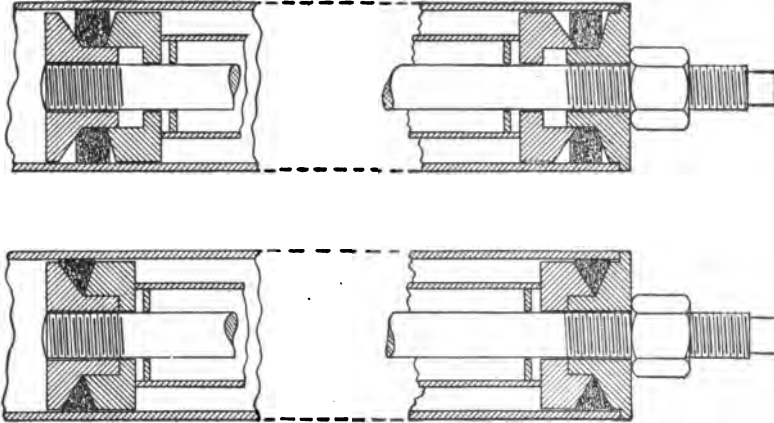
Another Type of Tube-Stopper Used without Drawing Fire. As the Parts are Screwed Up, the Asbestos Packing is Driven Hard against Side of Tube.
